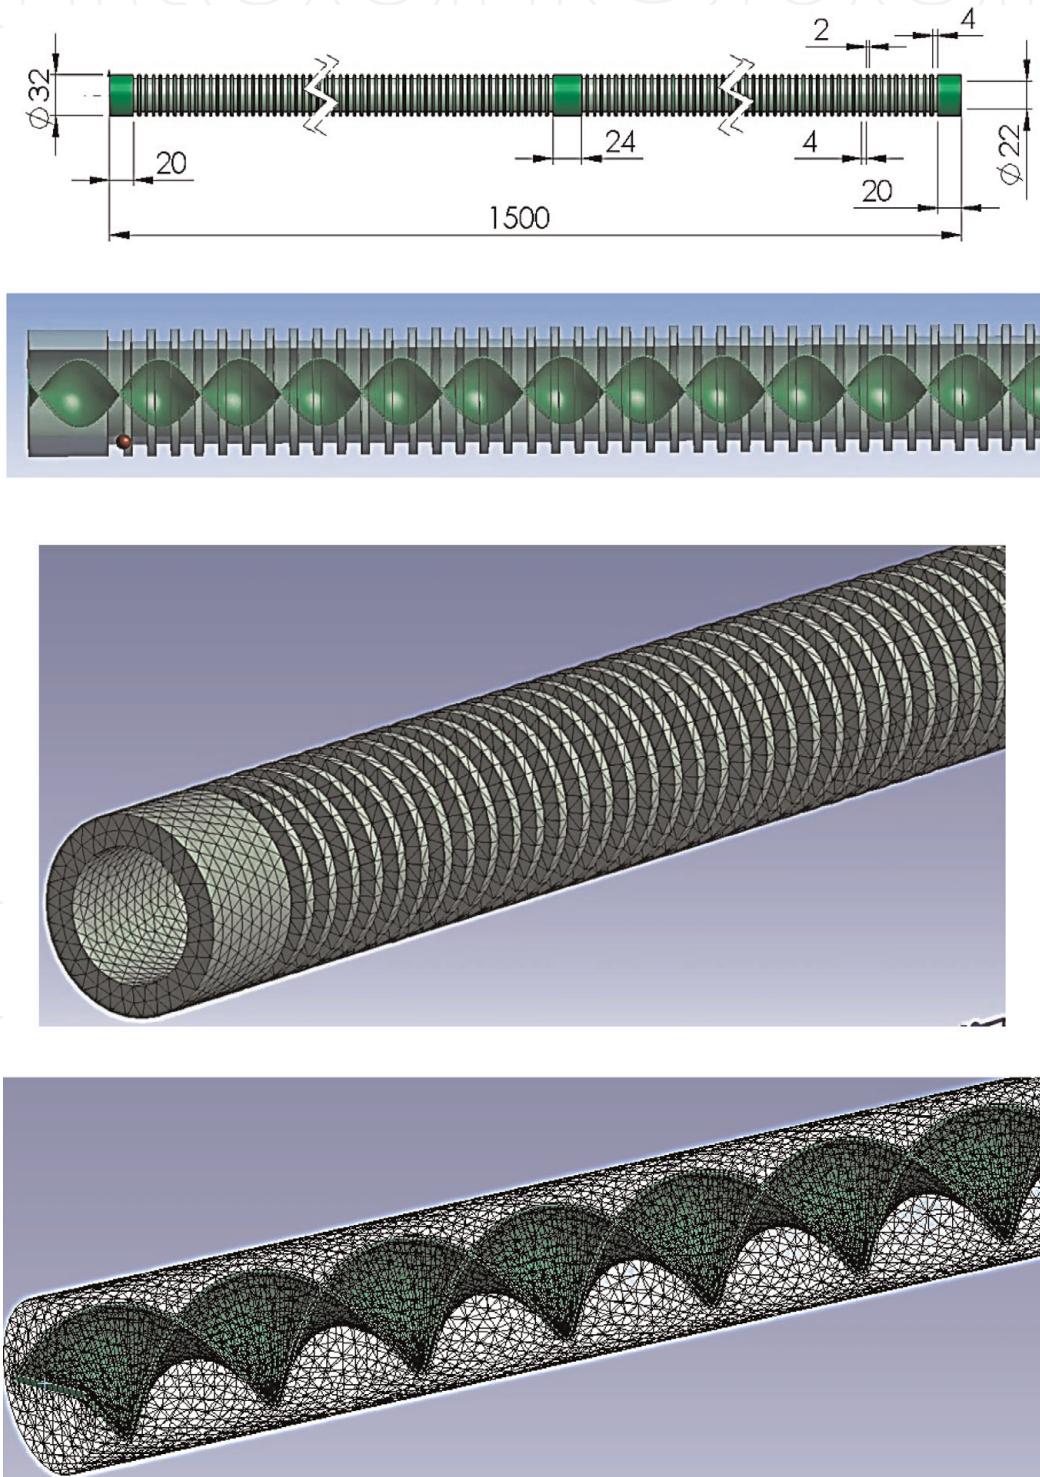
Physical geometry of finned tube (all dimensions in mm), geometry of twisted tape inside a finned tube insert, and meshing geometry.
